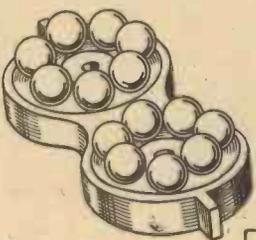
The gearbox, which consists of a thrust plate grooved to take two ball races.
